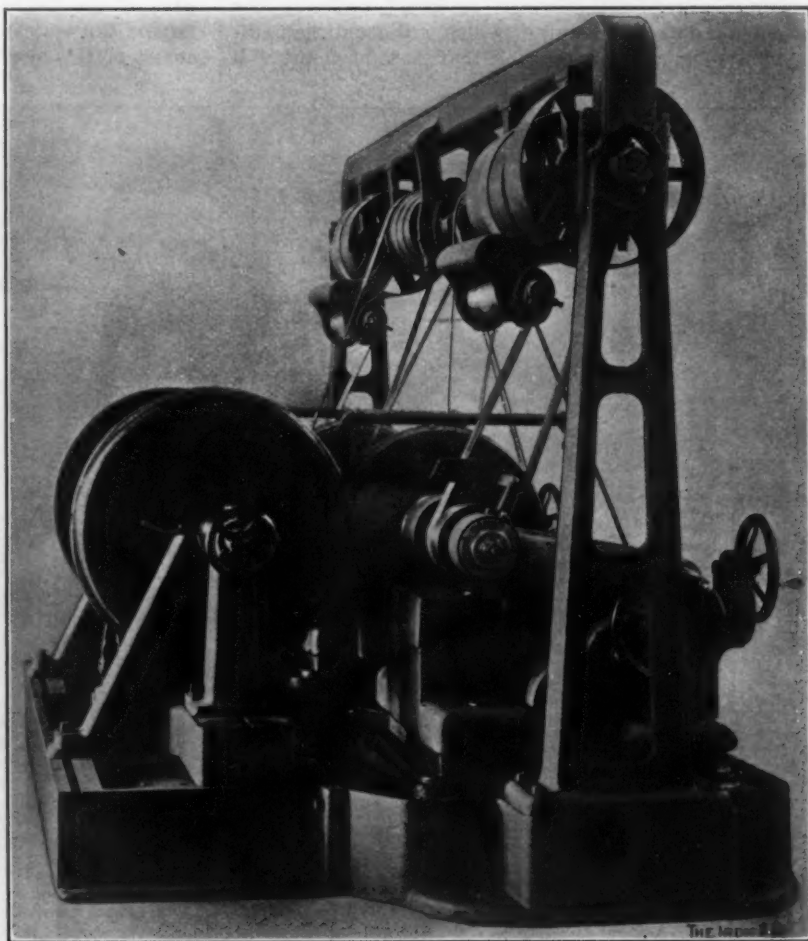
End View of the New Norton Car Wheel Grinder.
